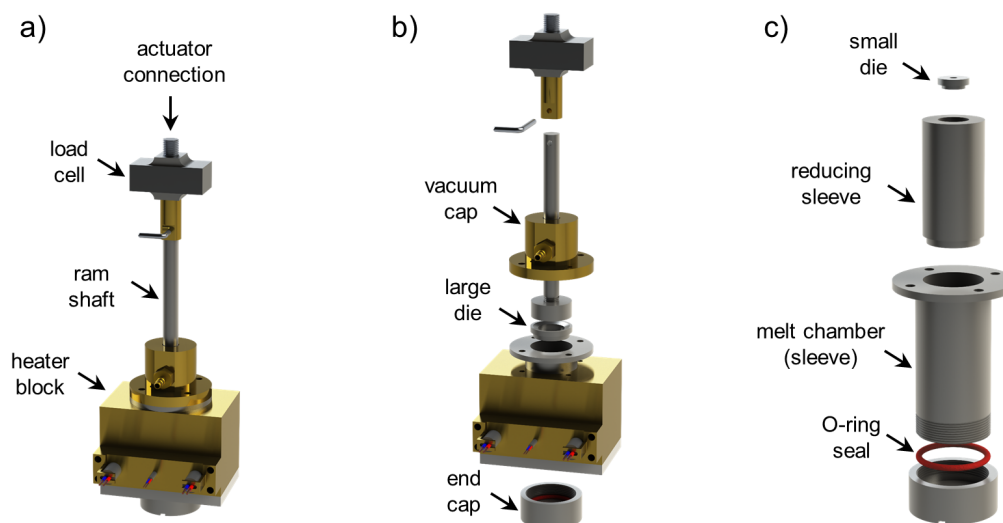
a) Rendered schematic of the primary BEX components. Not included are the linear actuator and support stand. b) Exploded view of the BEX components. c) Exploded view of the sleeve and die subassembly with the reducing sleeve configuration for small diameter extrusions.
